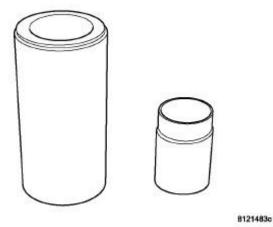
VM 1057 Seal Installer Courtesy of CHRYSLER LLC
